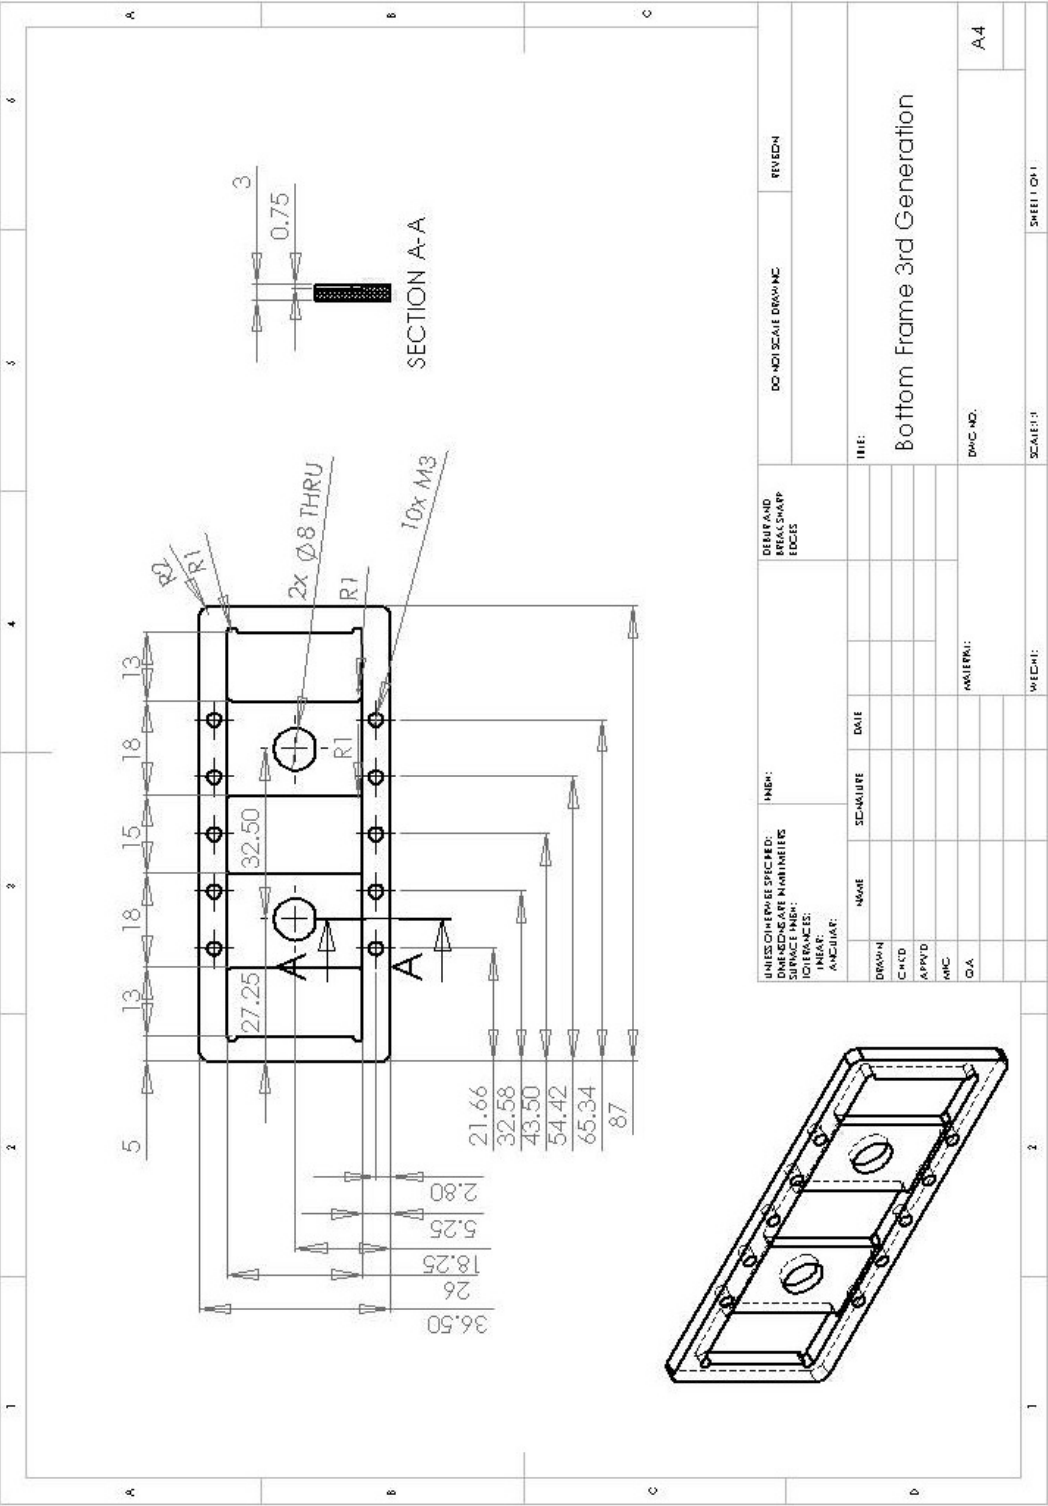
Frame for the third generation packaging system - Dimensions in mm.
